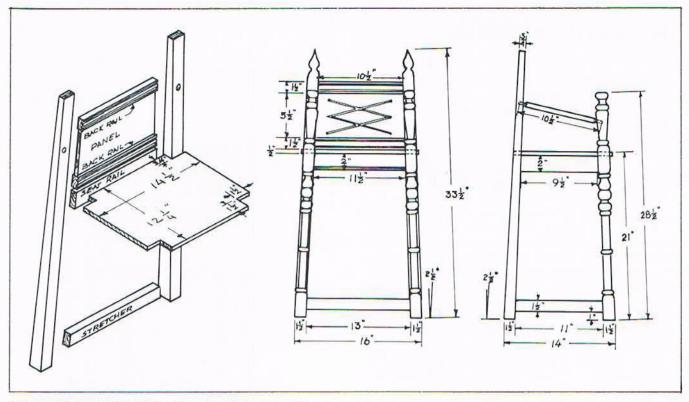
Wainscot High Chair: Elevations & Exploded View.
